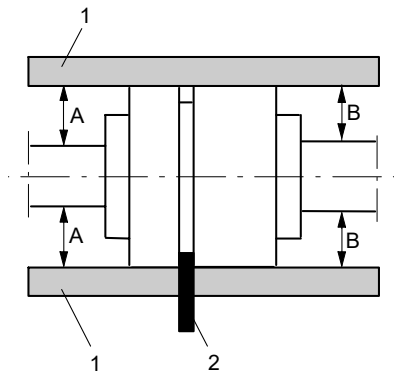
Non-spacer-type coupling, checking the coupling alignment
